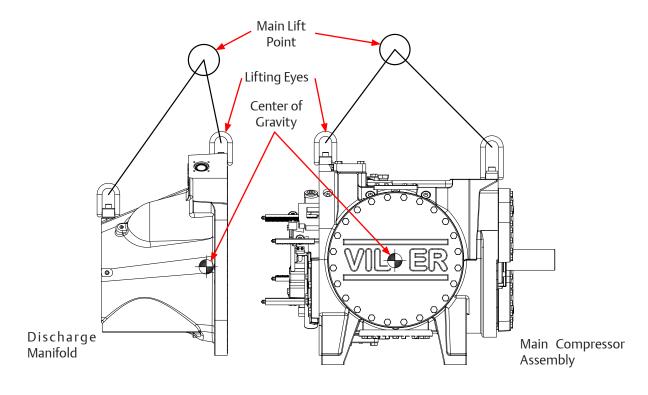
Bare Shaft Compressor Center of Gravity - Discharge Manifold and Main Compressor Assembly (Models 2401-3001)
